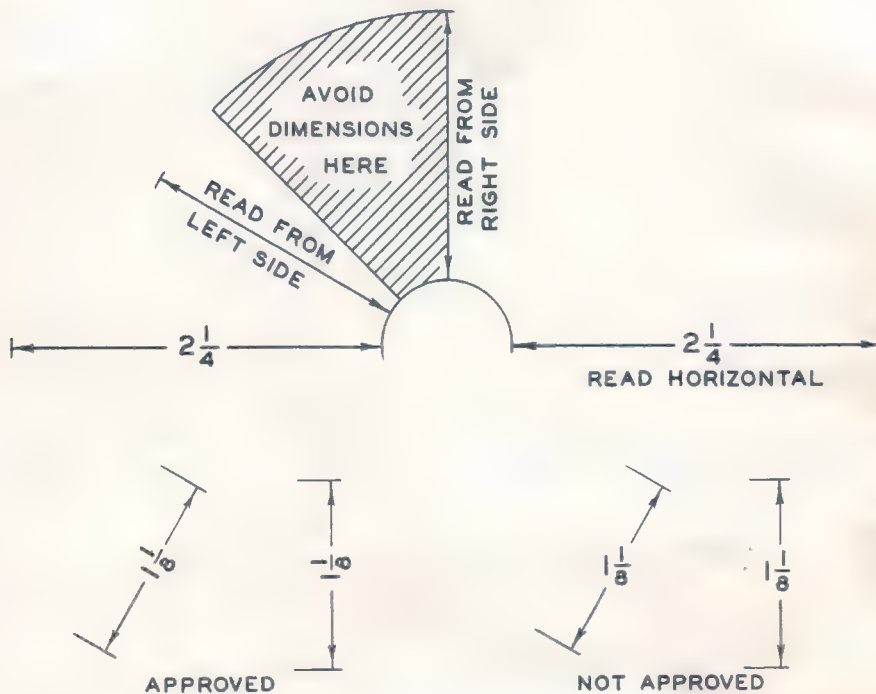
PLACING DIMENSIONS IN INCLINED POSITIONS
